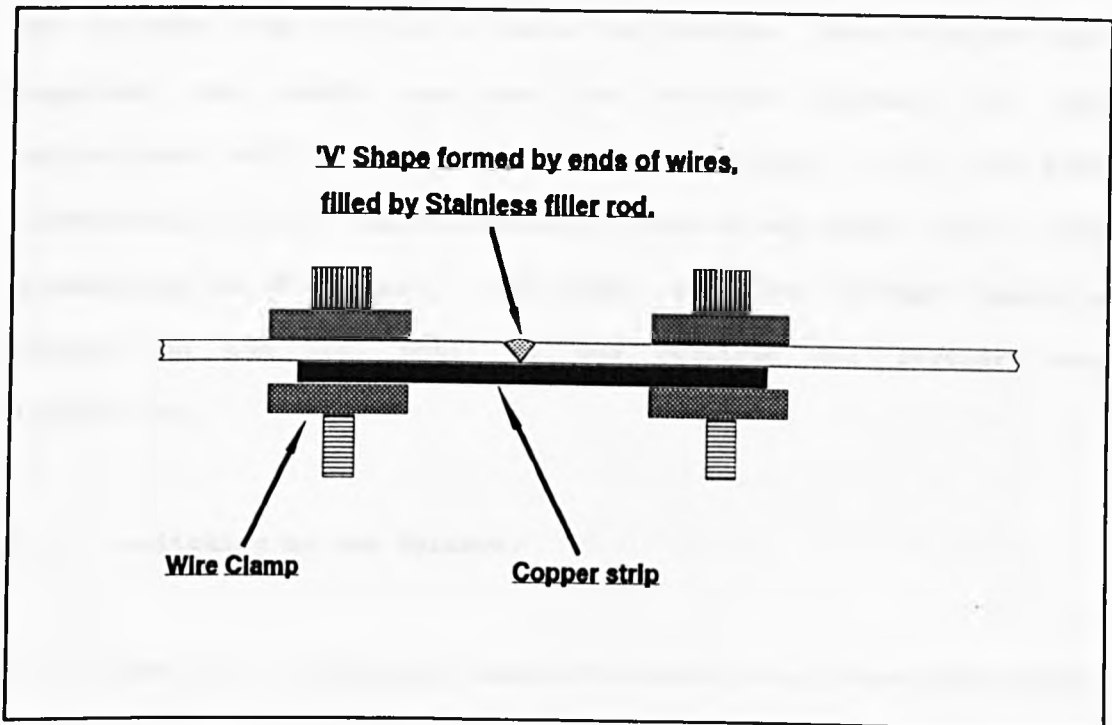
Joint produced using the electric arc-welder.
